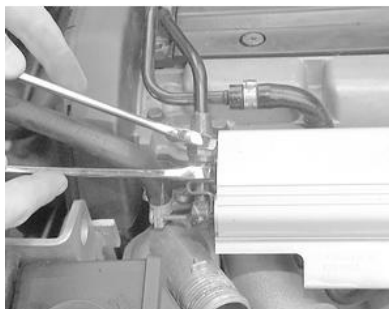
Remove the fuel return line clamp, and make sure both lines are free before removing the fuel rail
